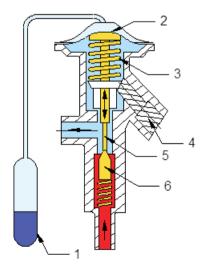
Thermostatic expansion valve with internal pressure compensation – cross-section: 1 – temperature sensor, 2 – membrane, 3 – membrane spring, 4 – ajustting screw, 5 – tappet, 6 – nozzle insert with valve cone (Source: own elaboration)
